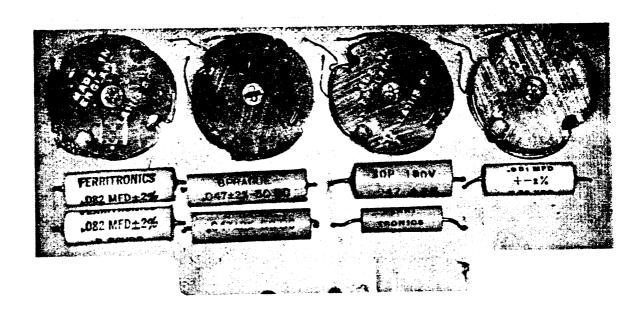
LOW PASS FILTER ASSEMBLY A11084-5
